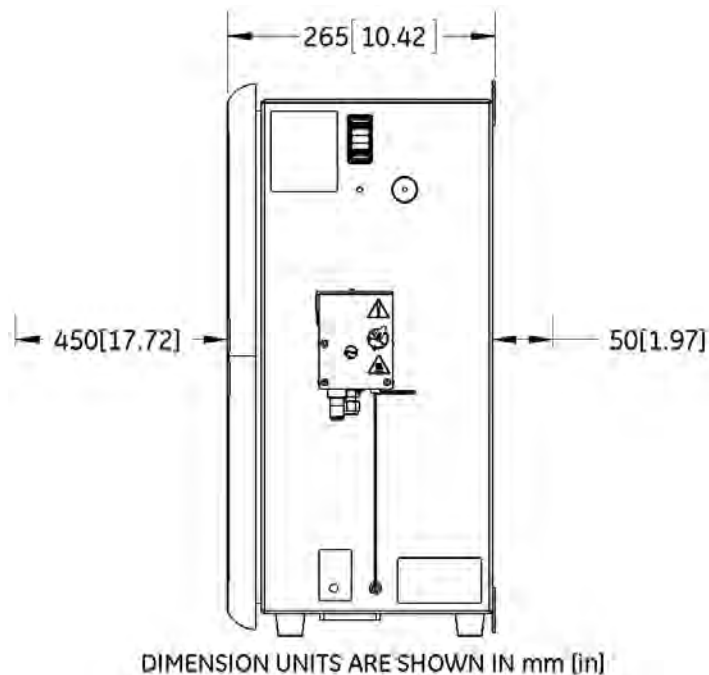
Required Installation Clearances — On-Line TOC Analyzer (Side View)
